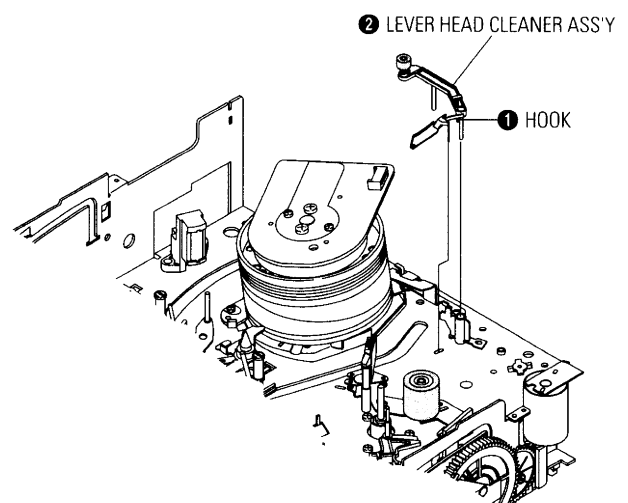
Lever Head Cleaner Ass'y Removal
